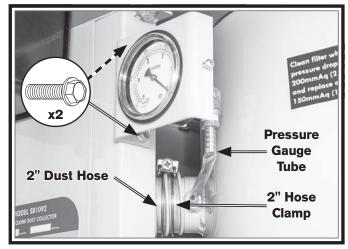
Pressure gauge assembly and 2" dust hose installed.
